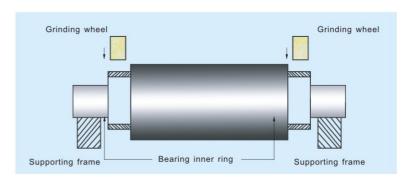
Fig. C: After grinding the roller neck surface to match the bearing, hot charging the bearing inner ring (generally use the induction heating method), grind the outer diameter of bearing inner ring after it has cooled completely. Make sure that the roughness, radial run-out and concentricity are in compliance with the tolerance requirements after grinding.
